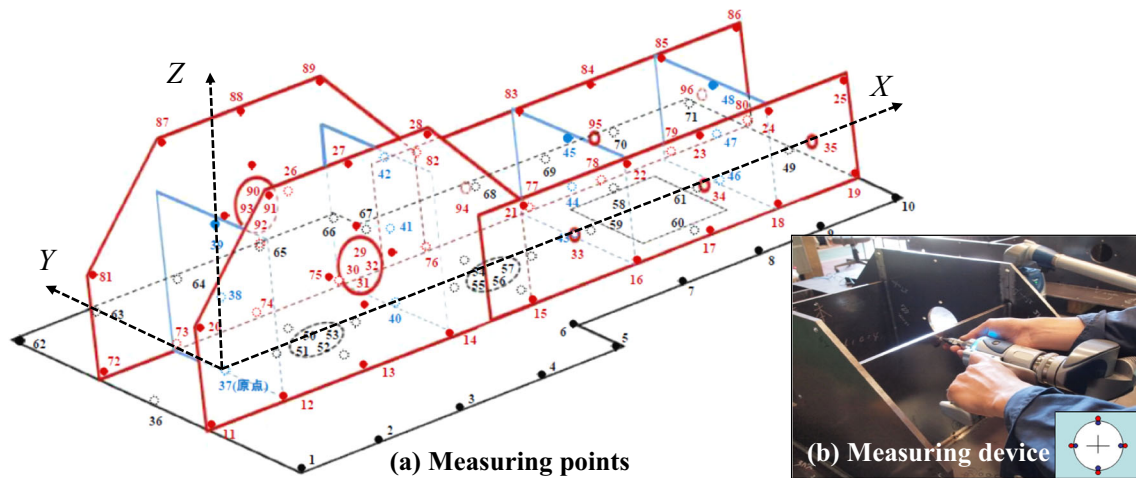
Measuring points and method for welding deformation in the experiment
